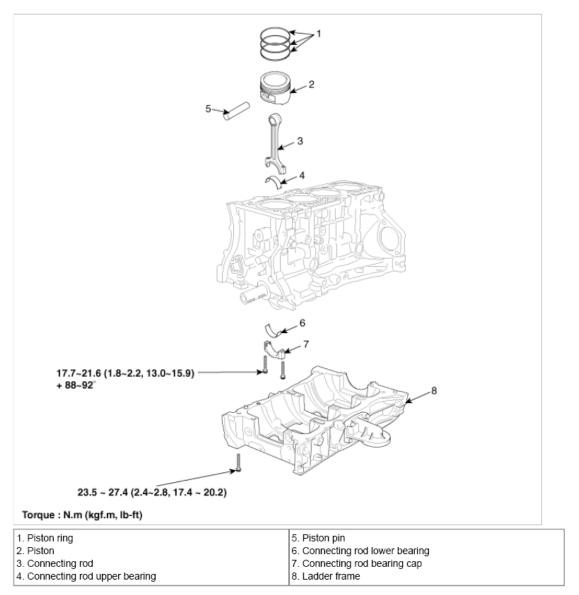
Identifying Cylinder Block Components With Torque Specifications (1 Of 2) Courtesy of KIA MOTORS AMERICA, INC.
